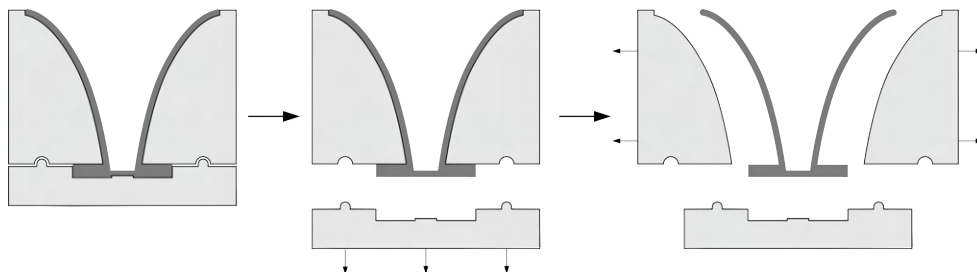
Demoulding process for a mould with integrated mounting interface.
